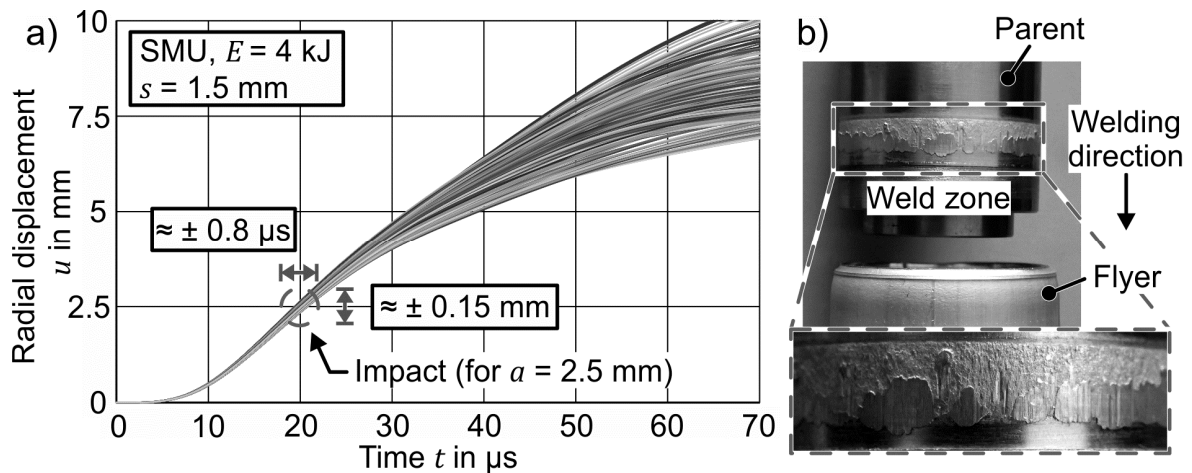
a) Simulated displacement of the nodes at the inner radius in the axial center of the tube, b) example MPW specimen after shear testing
